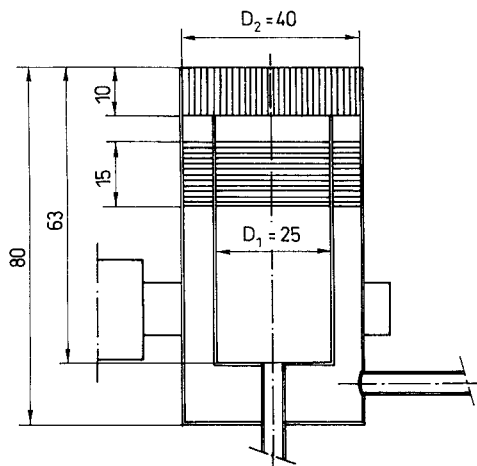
Sketch of burner type II with detailed dimensions in mm
